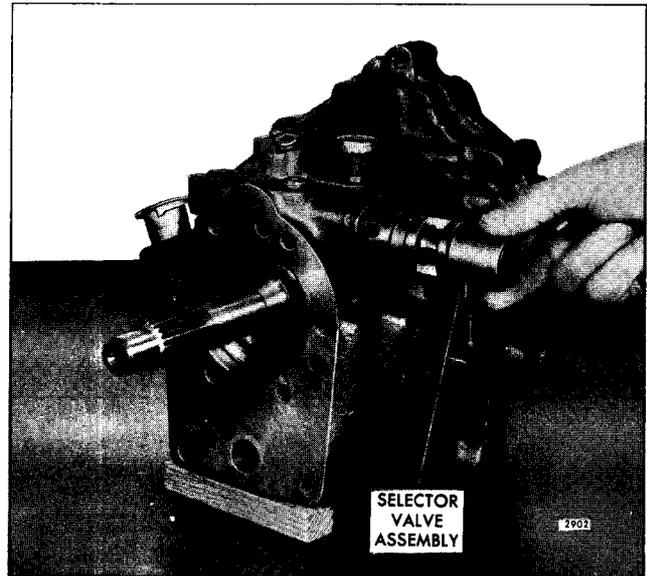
Installing Selector Valve Assembly in Gear Housing
